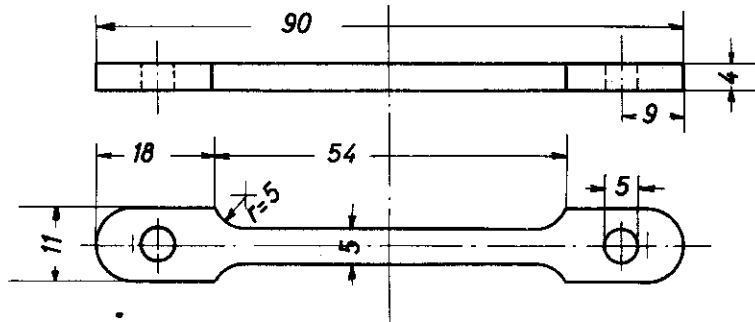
Flat Specimens for Stress-to-Rupture Tests (Dimensions in mm.)
